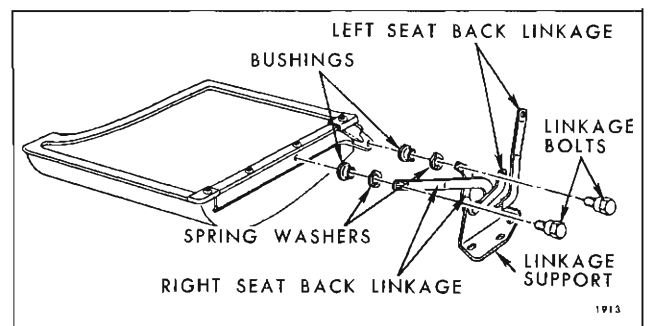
H39—Folding Second Seat Back Inner Linkage and Support
